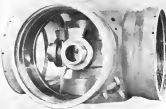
Side view of hub showing blade stop, synchronous gear drive, and bottom flange.
